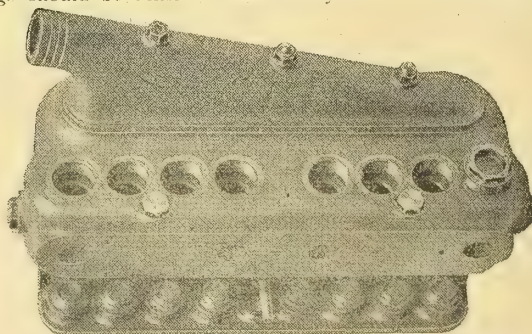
After Repair by Barimar Scientific Welding Experts.
